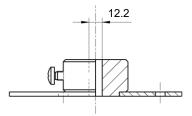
Mounting flange for FF90 humidity and temperature sensor
